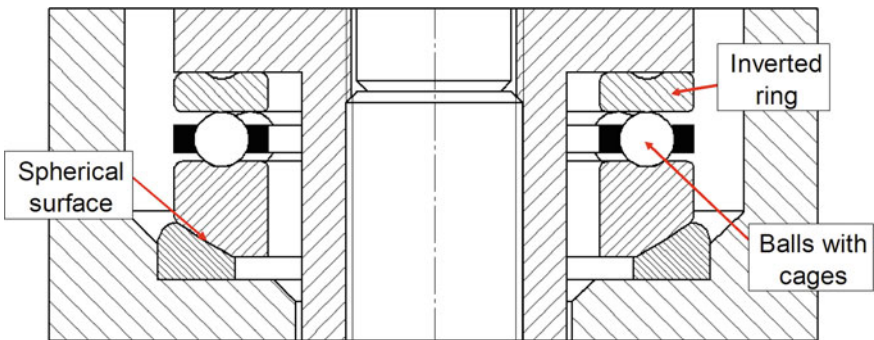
A detail of the thrust bearing with an inverted ring
